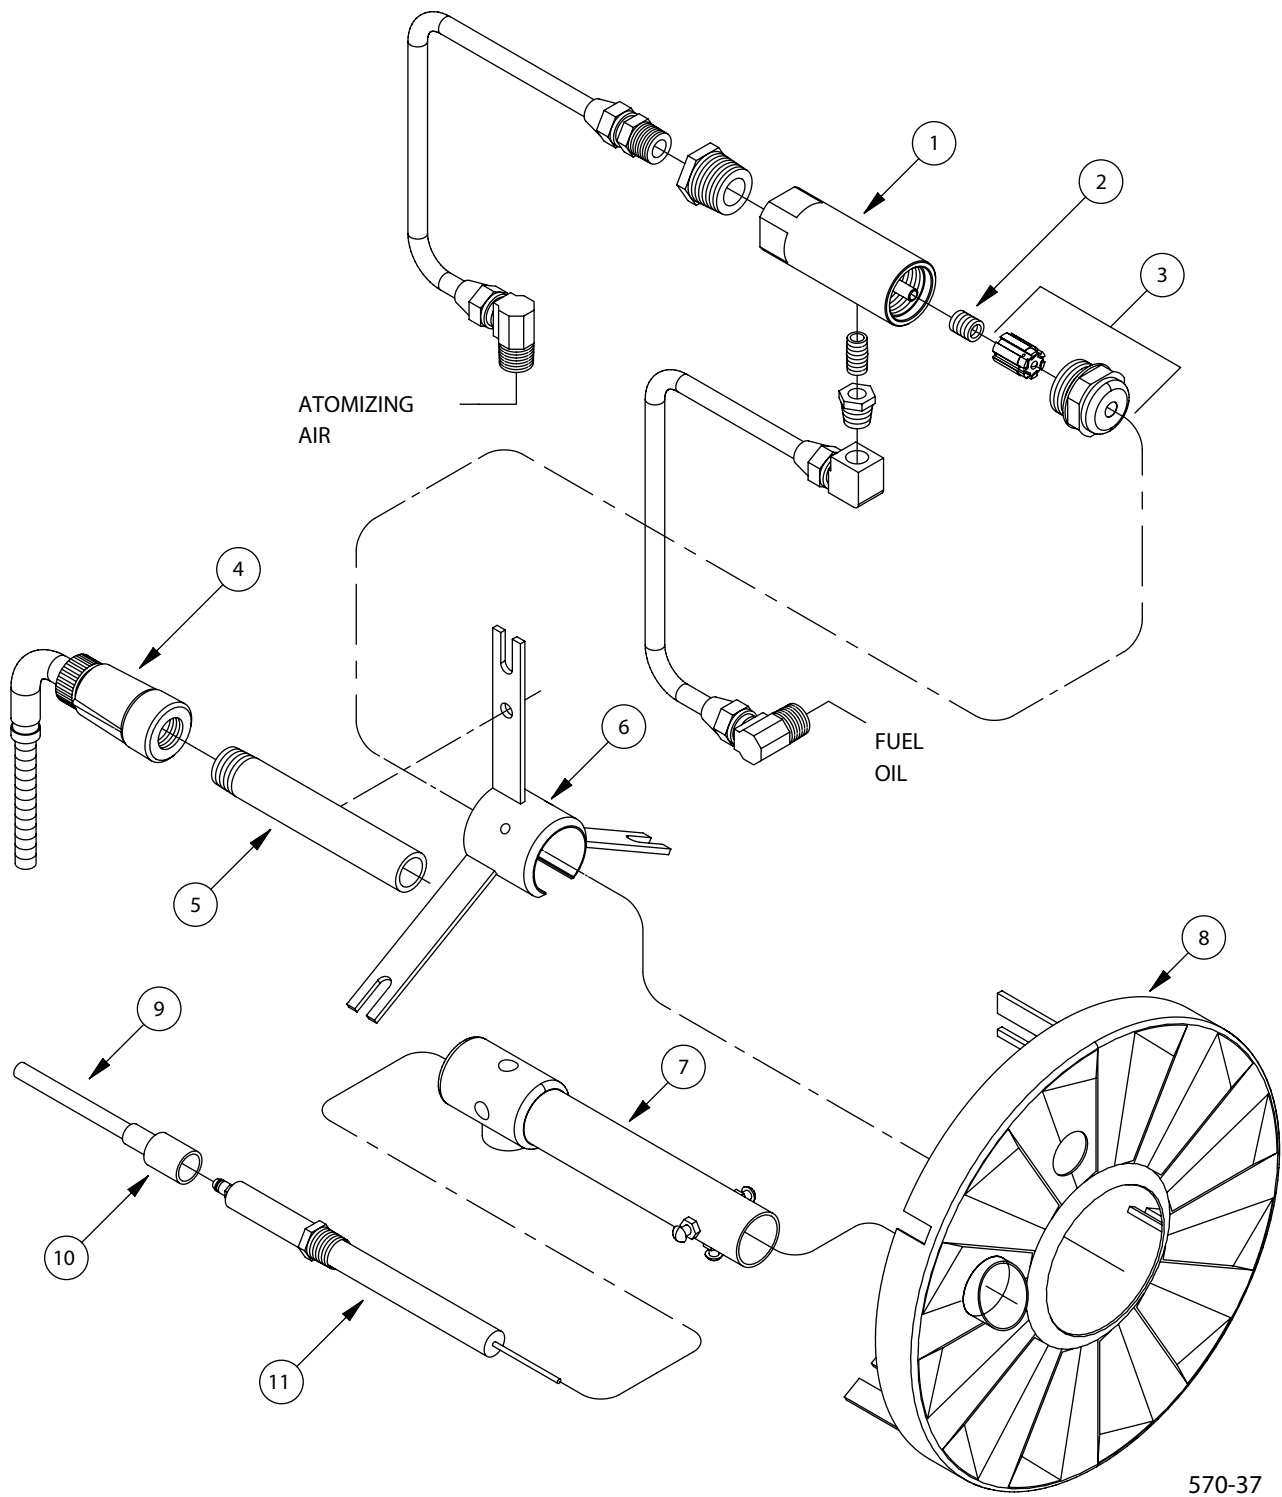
DRAWER ASSEMBLY. D42 - 63
